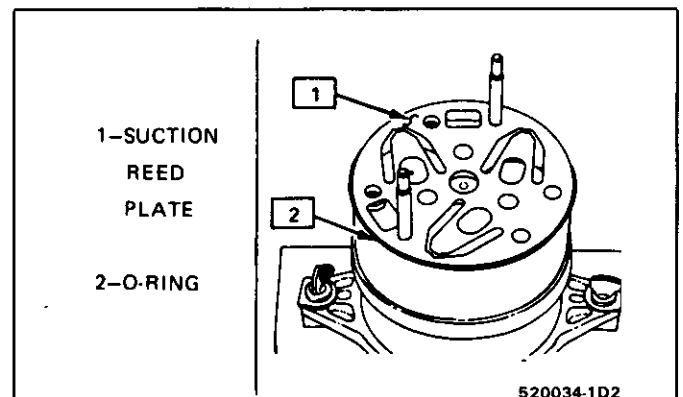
Suction Reed Plate Assembled To Cylinder Assembly
